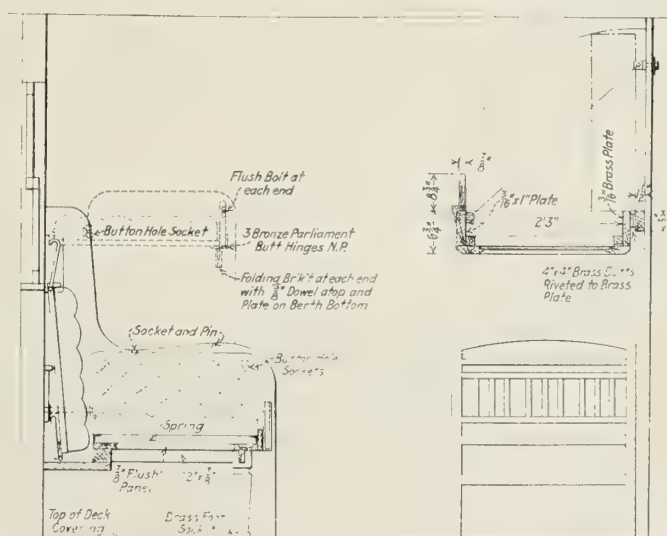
Typical Section, Showing New Arrangement of Cabin Staterooms
